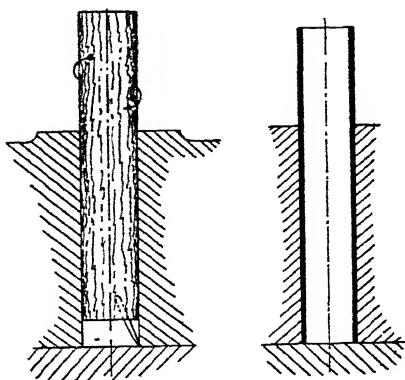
METHODS OF SCRIBING THROUGH DEEP HOLES ON TO SURFACES FOR DRILLING
